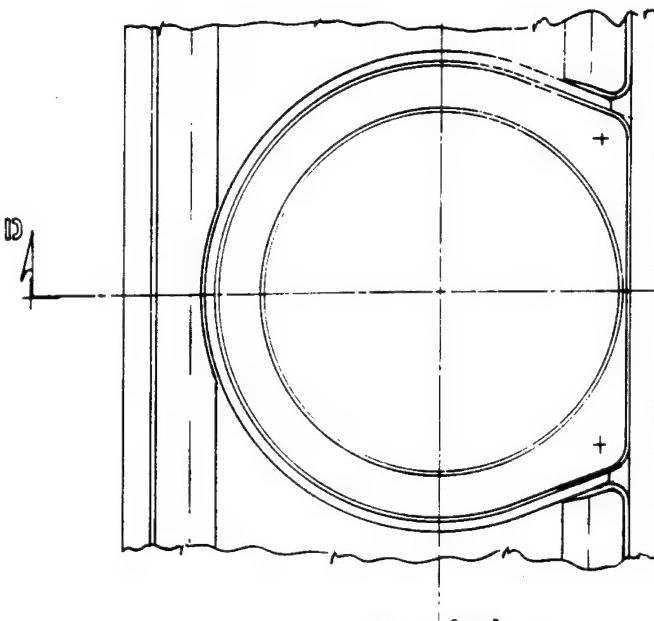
Shell Assembly - Helicopter Transmission Housing (WRD Drawing No. 4691).
